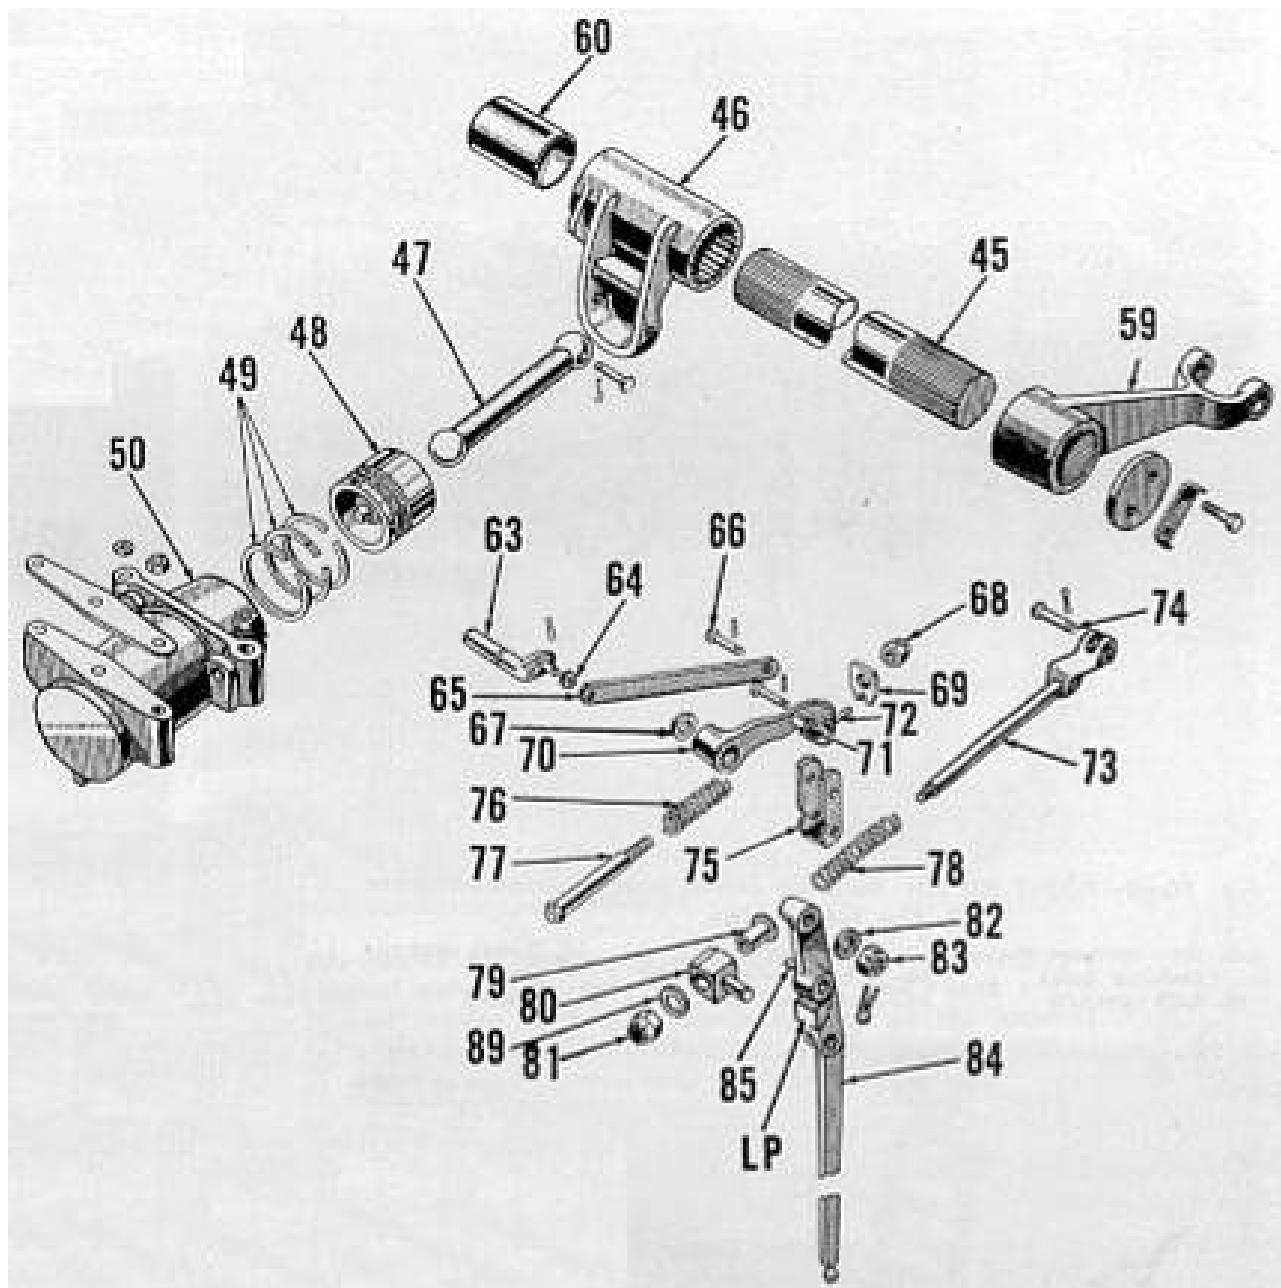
Model 8N ram cylinder (50), lift shaft arms (59), constant draft control rod (73), position control lever and linkage units which are mounted on the hydraulic lift cover. (See Legend below)
